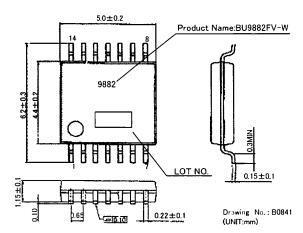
(c) PHYSICAL DIMENSION SSOP14(BU9882FV-W)
